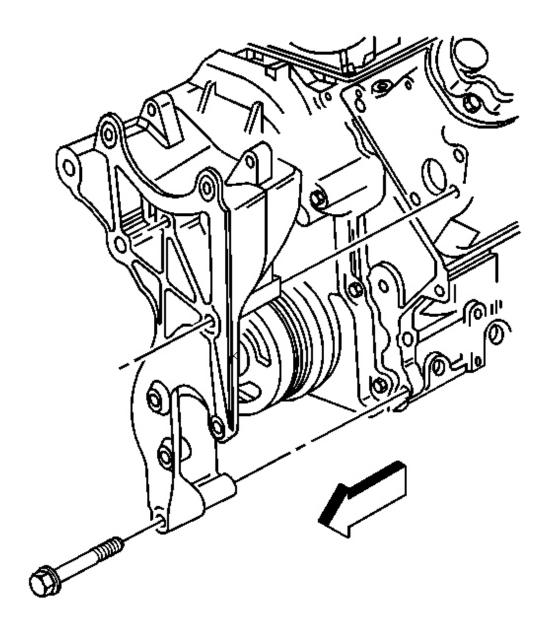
View Of Generator Bracket & Bolts Courtesy of GENERAL MOTORS CORP.
